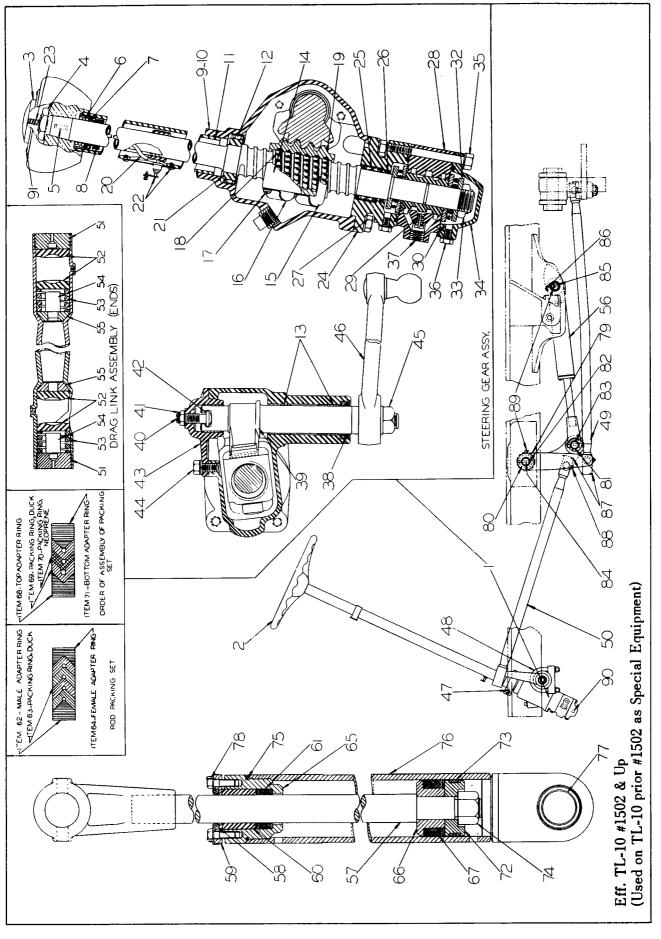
HYDRAULIC POWER STEERING GROUP
